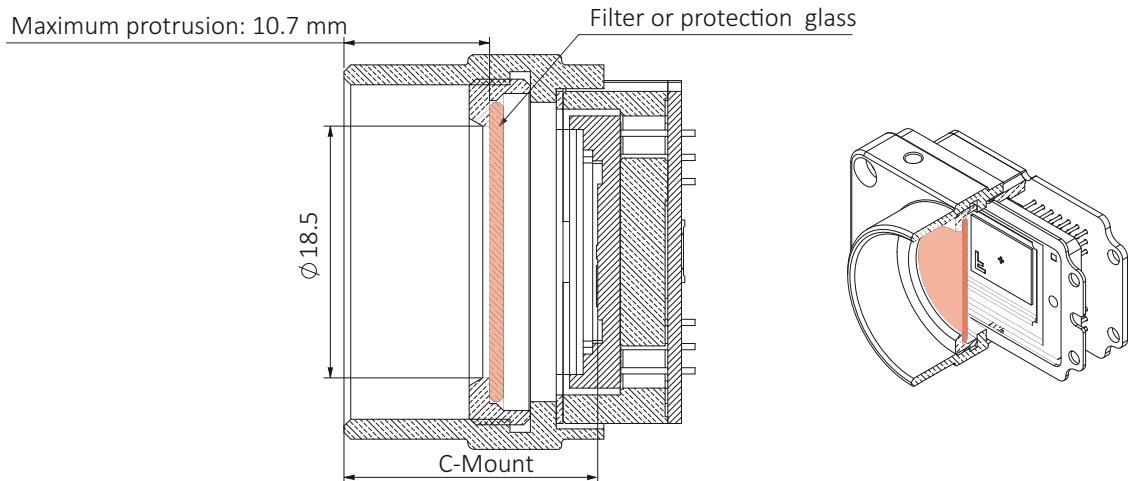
Manta type B C-Mount dimensions (22 mm filter)
